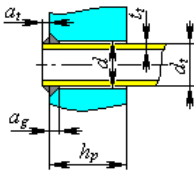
Tube holders in the sheet as per GOST 34233.7-2017
